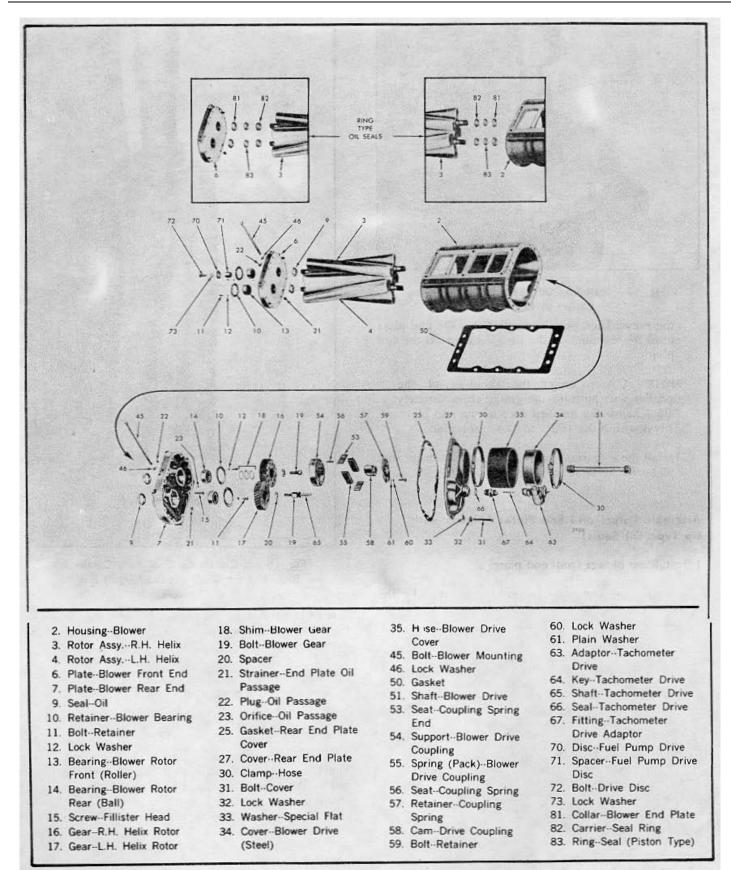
Blower (Small Bearing) Details and Relative Location of Parts
